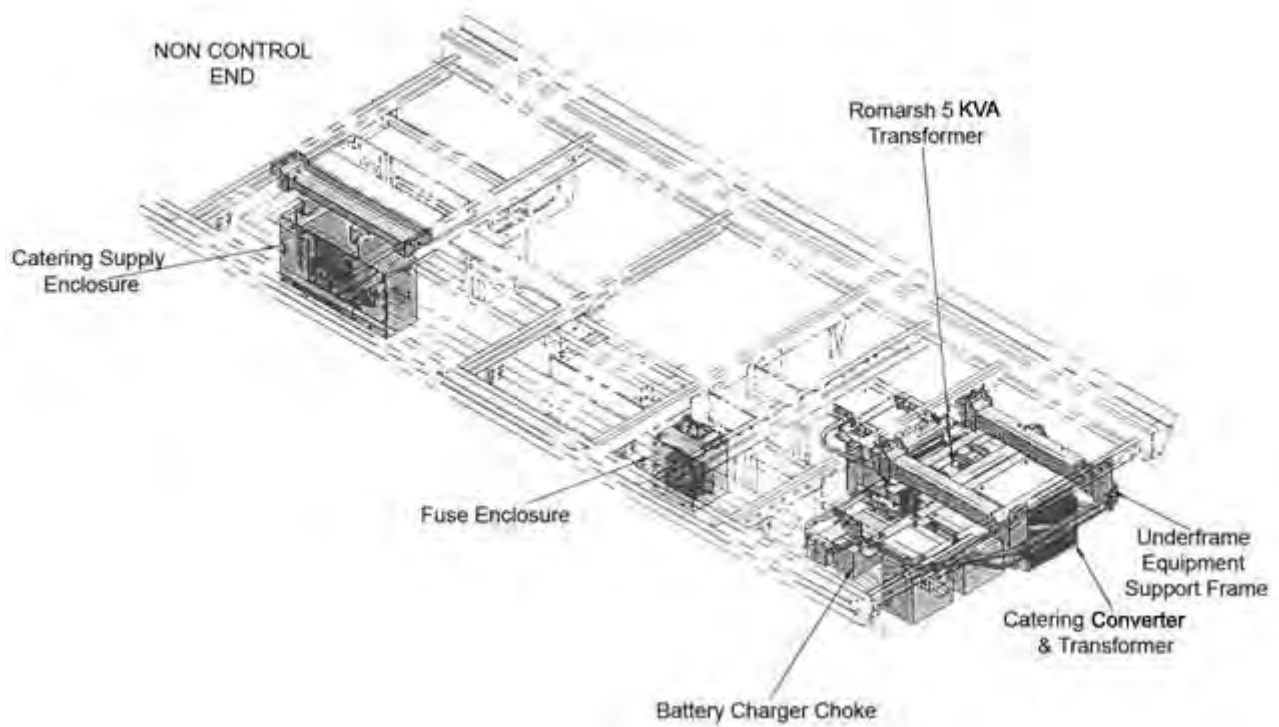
HST TSB Vehicle Underframe Equipment Arrangement
